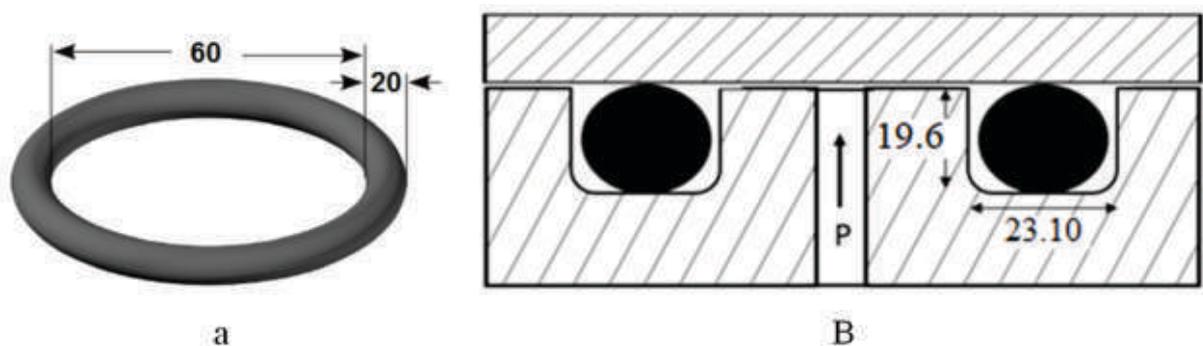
a) Schematic of an O-ring, b) The static O-ring flange seal assembly
